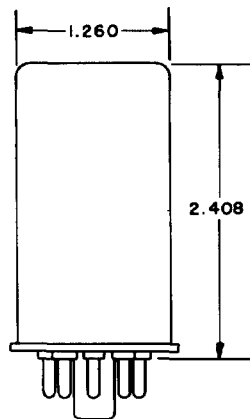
Dimensions of miniature, cylindrical, temperature-controlled, transistor plug-in oscillator developed by James Knights Company. Packaged unit is provided with a standard octal base
